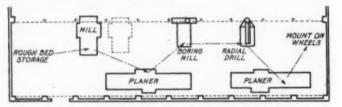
LAYOUT OF DEPARTMENT FOR BED MACHINERY
